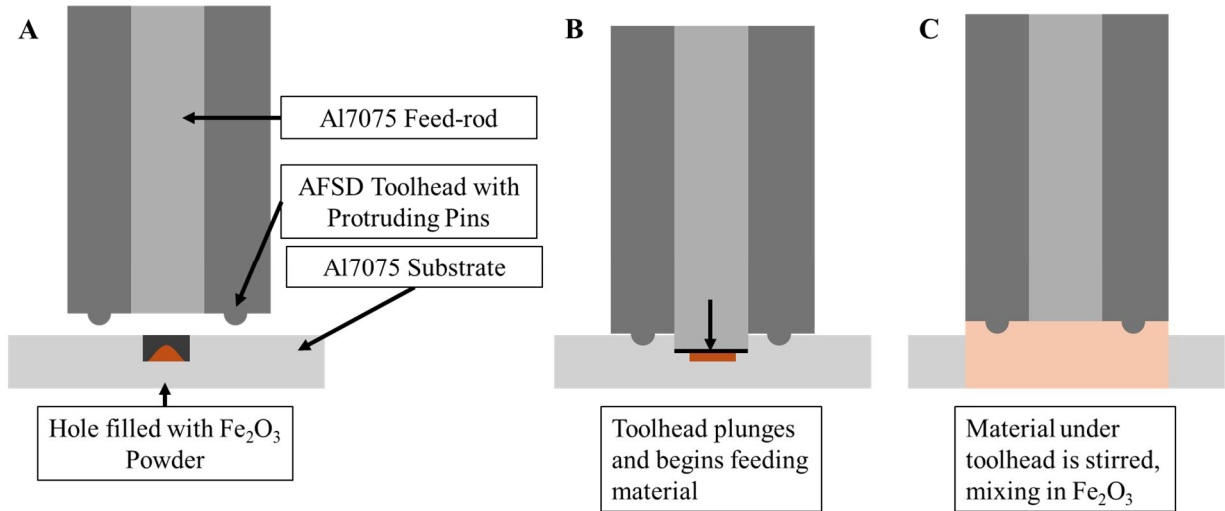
Hole repair print process diagram: (A) Pre-print preparation stage, (B) Start of hole repair print, (C) End of hole repair
